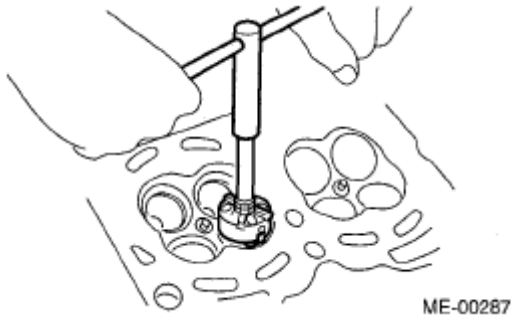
Inspecting Intake And Exhaust Valve Seats
